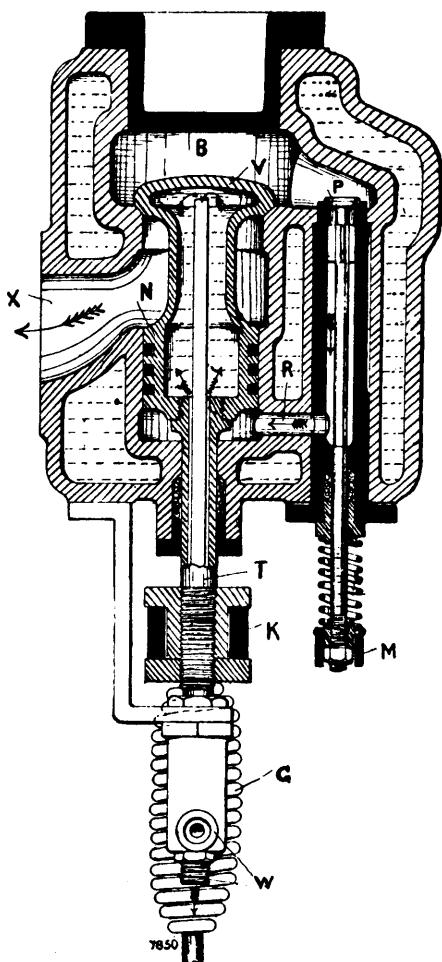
WATER COOLED EXHAUST VALVE WITH BALANCING PISTON AND PILOT VALVE.
